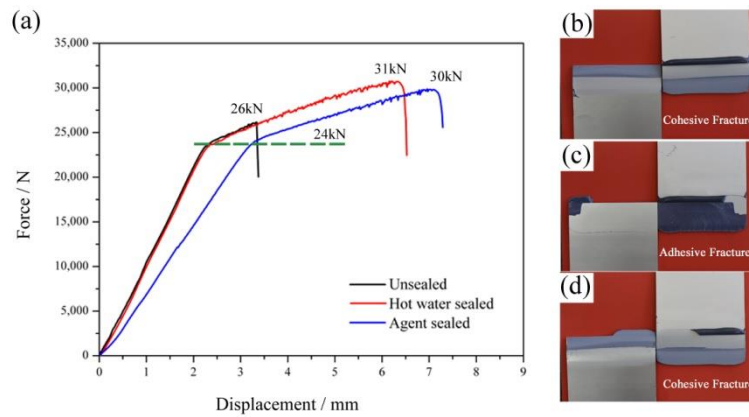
(a) Representative shear force/displacement curves for the samples of different anodizing process, (b) fractured surfaces of unsealed sample, (c) fractured surfaces of hot water sealed sample, and (d) fractured surfaces of agent sealed sample.
